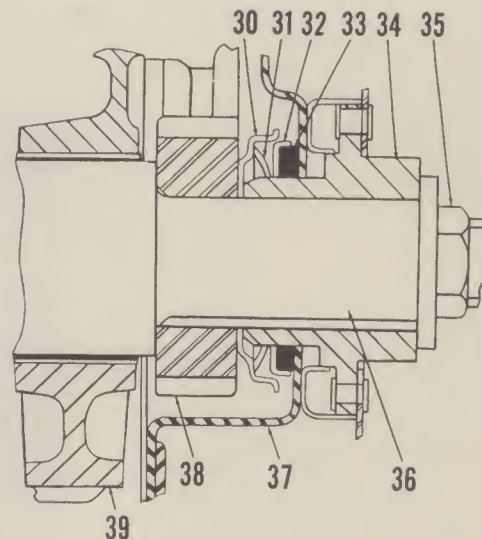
Latest rocker arm (IKS206E and F) has better oil control than type shown in Fig. 0463.
